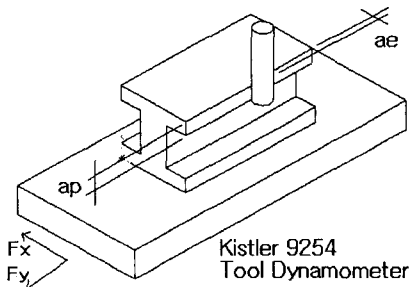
Diagram of Tool Dynamometer and Workpiece
